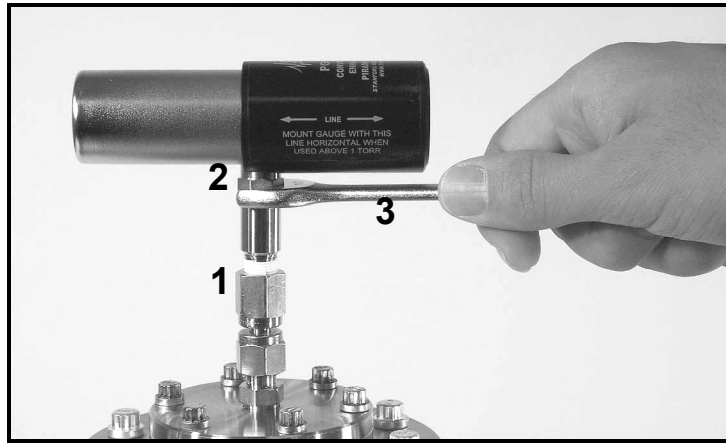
Proper installation of a PG105 gauge on a 1/8 NPT port. 1. Female 1/8 NPT Fitting, 2. built-in nut, 3. 1/2" (or 13 mm) wrench.
